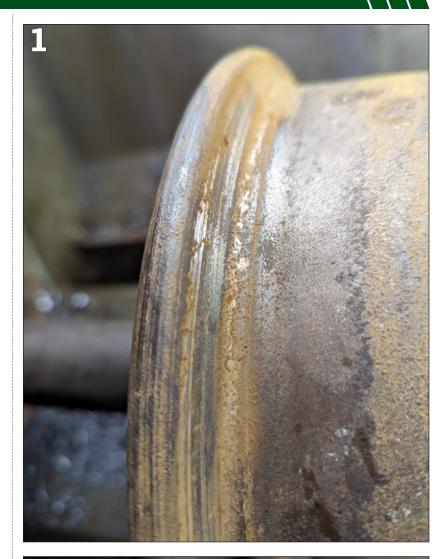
A carriage wheel with a welded-up root radius, note the strange wear patterns visible.
